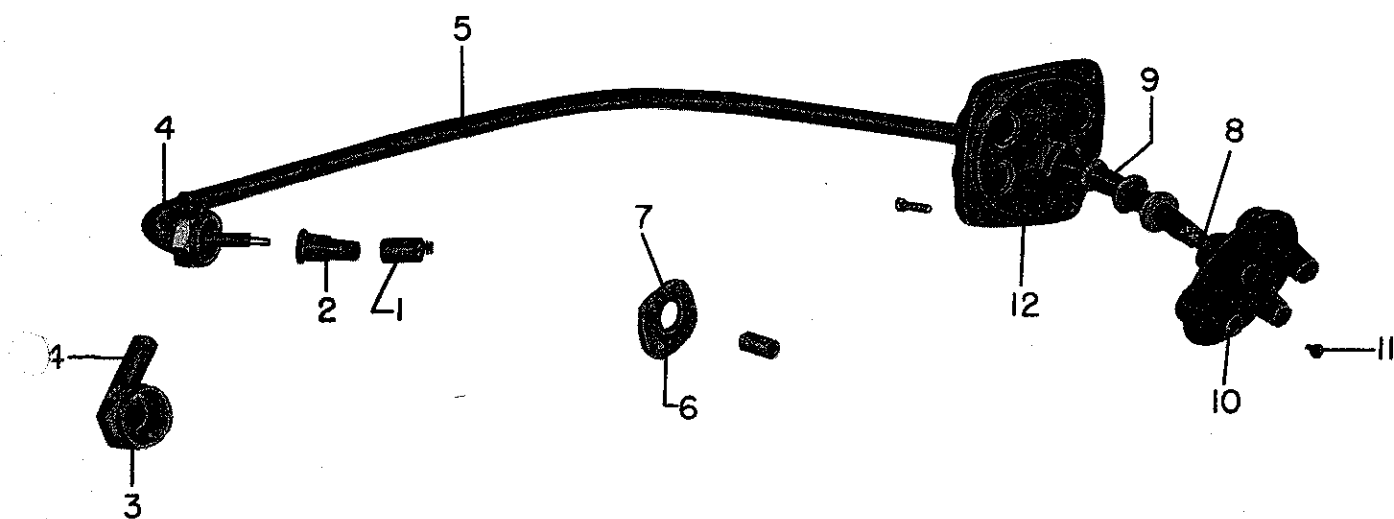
Shielded Ignition Cable - Avco Lycoming 5MM
